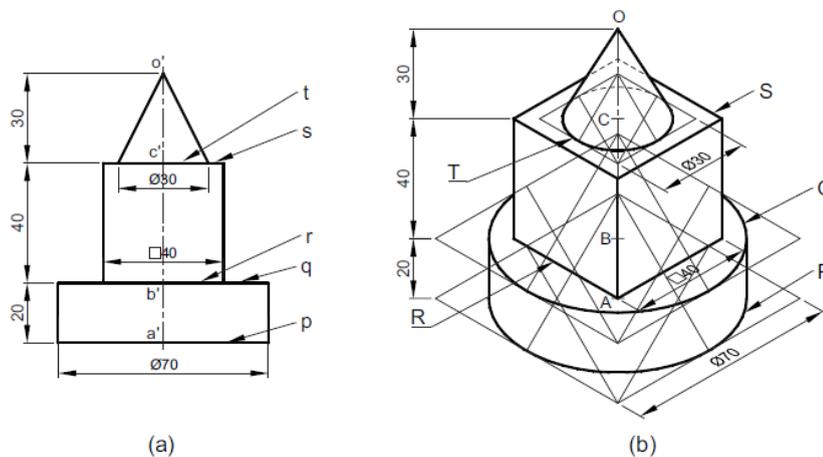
Combination of solids (a) Front view (b) Isometric projection
